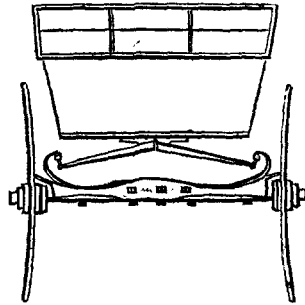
, represents the frame of a railway carriage, as seen with the patent springs and double guide plates of one-fourth inch plate iron, made, as shewn, of several pieces riveted together, or cut out of a single sheet. It is to be noticed, that the spring box plays within the guide plate, and thus the dirt and dust are kept from the oil, or the piece riveted on may be cut off, so as to allow the spring box to play outside, if preferred.
